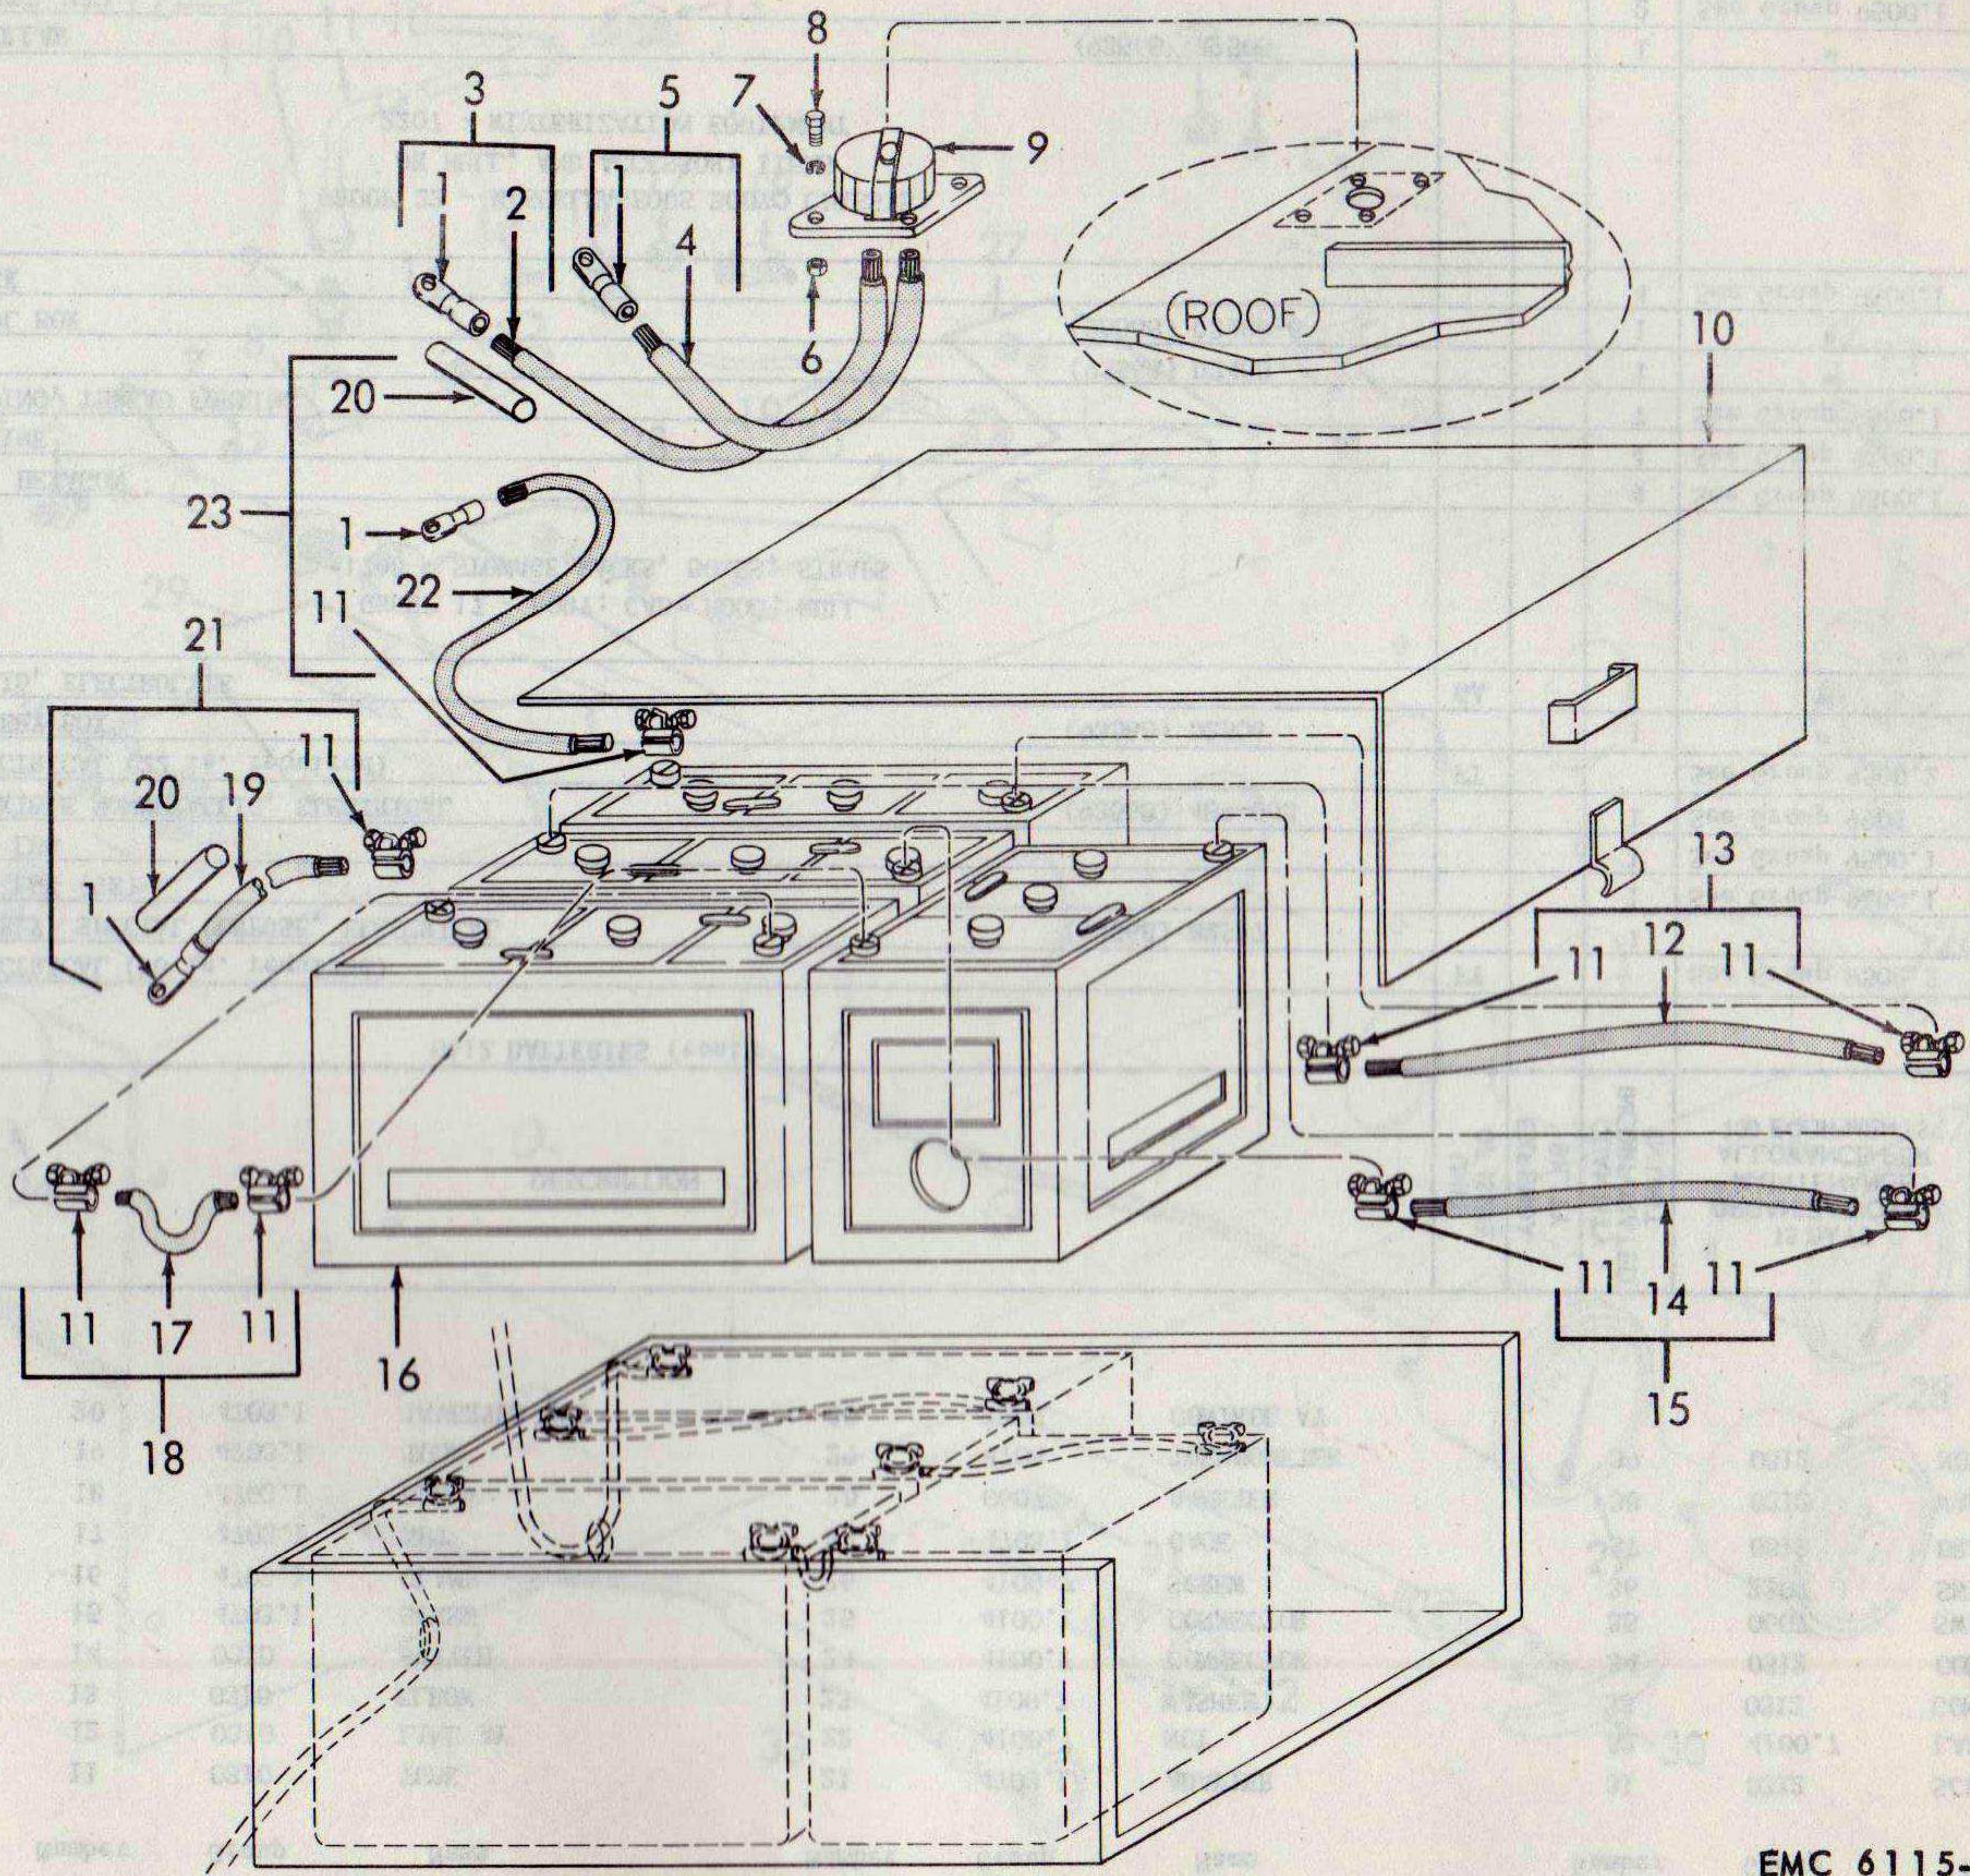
Storage Batteries, Battery Box Cover, and Cable Assemblies.
